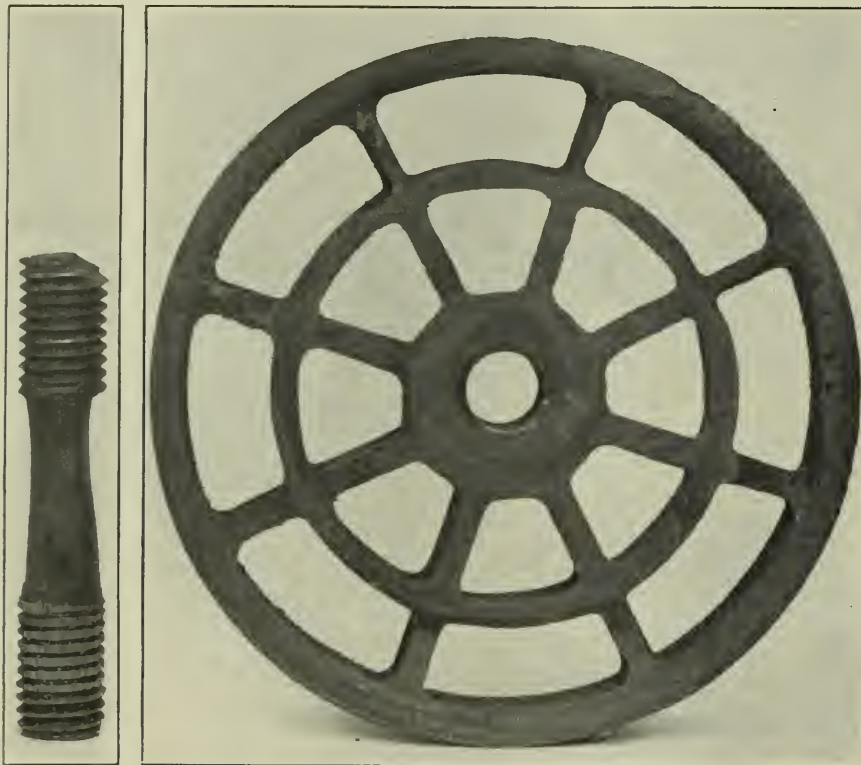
VALVE STEM AND SEAT, SHOWING THE DEGREE OF WASTING AWAY
